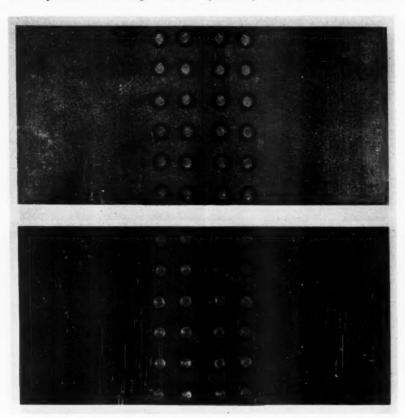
Top and Bottom Surfaces of a Riveted ZG62A Aluminum Specimen, 0.064 in. Thick, After Being Exposed to Industrial Atmospheric Conditions for a Six-Month Period.
